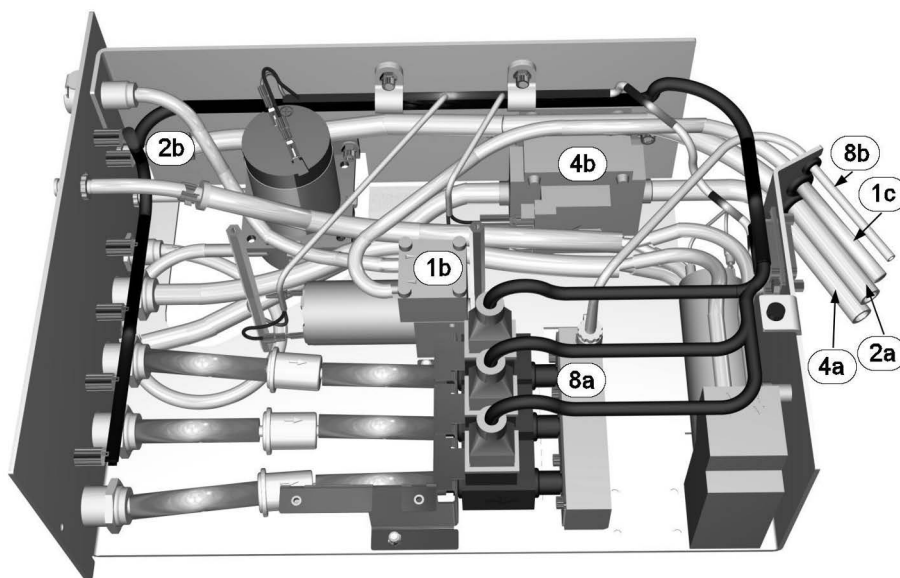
Pumps module overview (inside view - without liquid protection)
